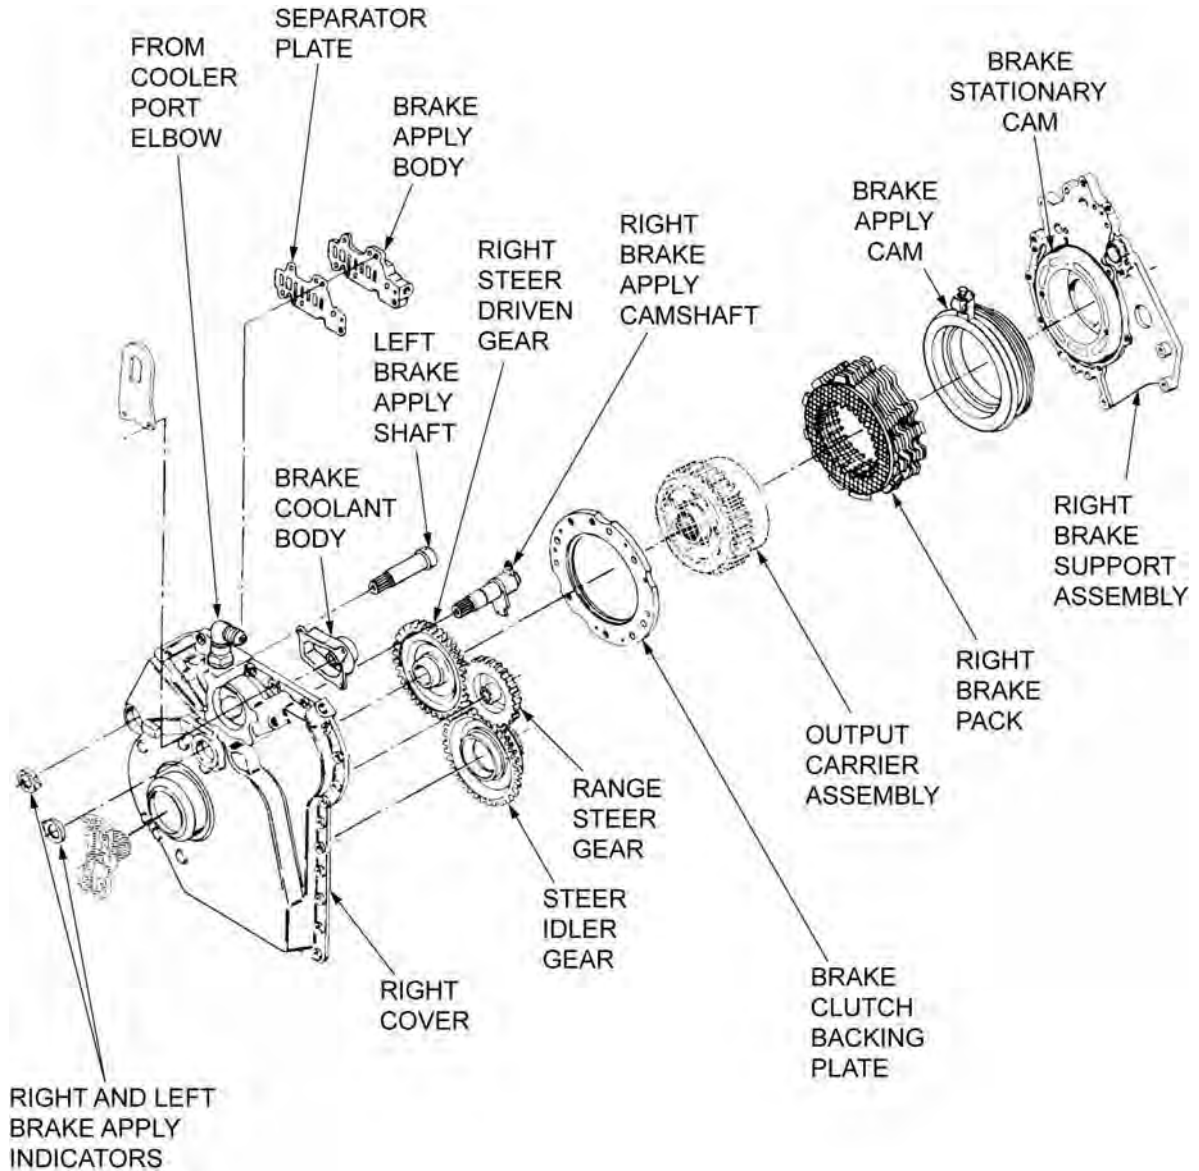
Exploded View of Major Components of Right Cover Assembly.
